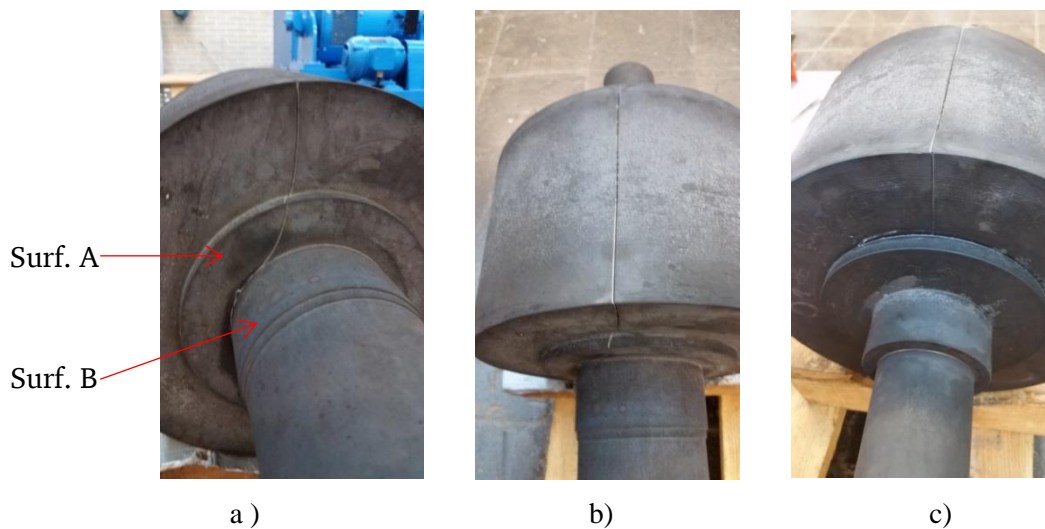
Cracks occurred on the flywheel rotor during quenching process from 850 °C to 180 °C: a) view on the side connected with the shaft Φ95 in Fig. 5-21, b) view on the flywheel body outer surface, c) view on the side connected with the shaft Φ75 in Fig. 5-21
